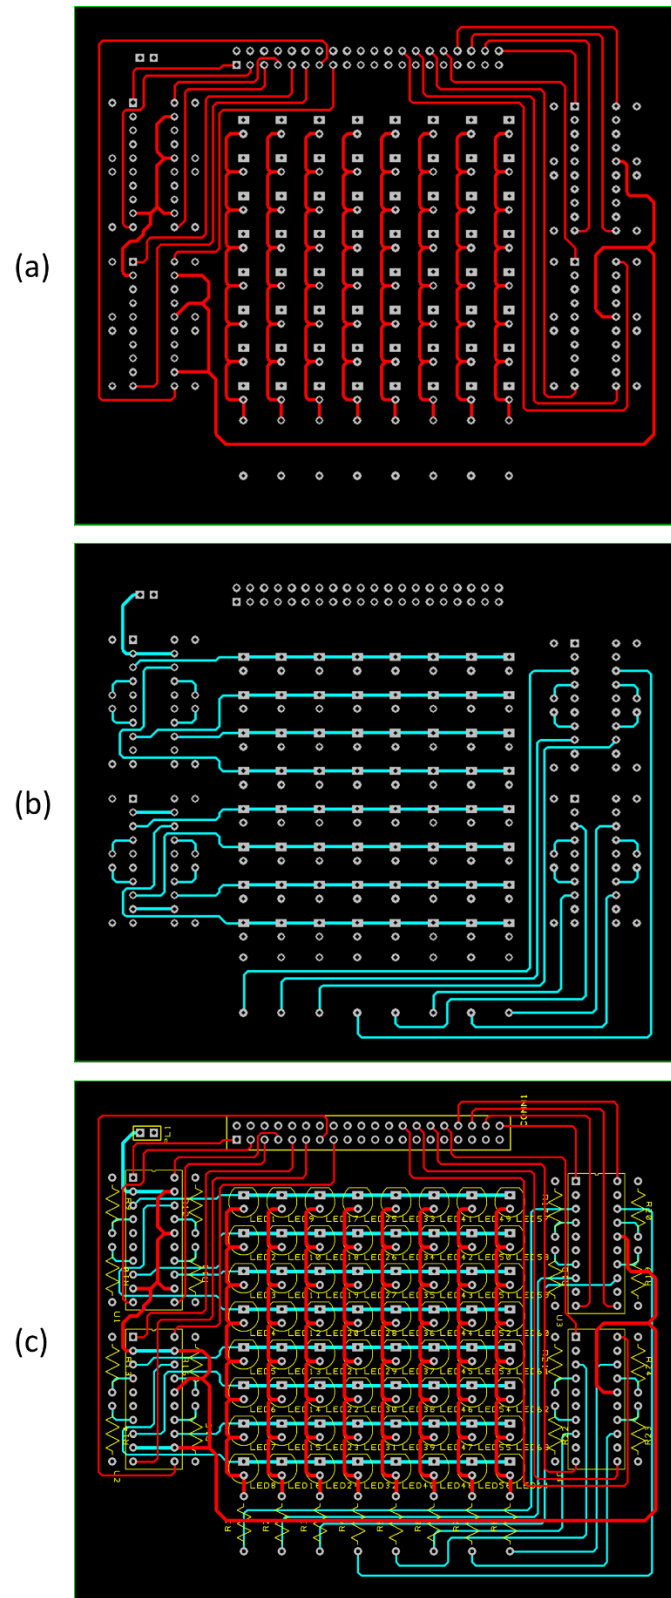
2-layer PCB layouts of LED indicator for cross-electrode array. (a) Top layer. (b) Bottom layer. (c) Stack-up layout.
